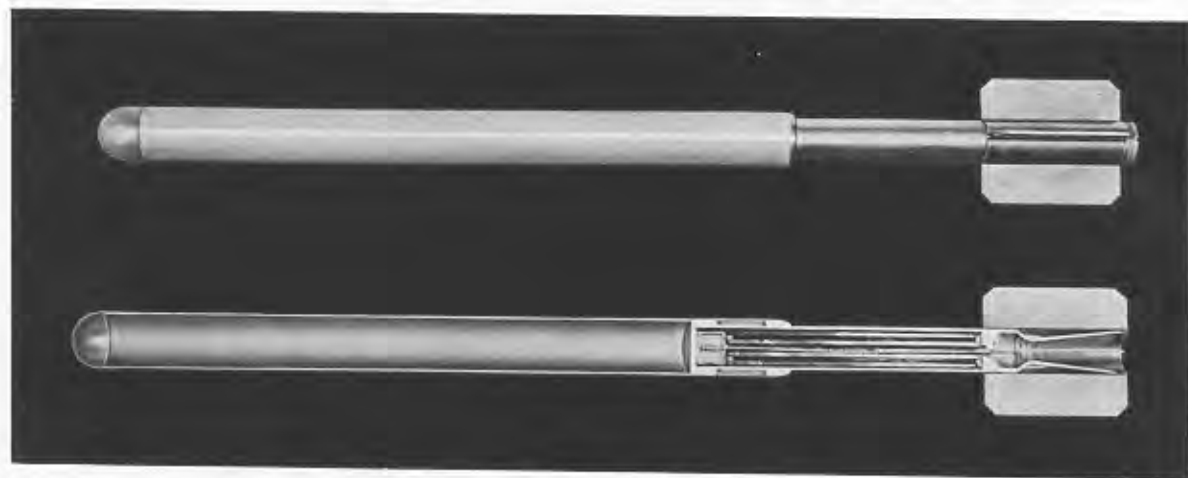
Assembled CWG and cutaway showing nozzle and head construction and double-web tubular charge.
